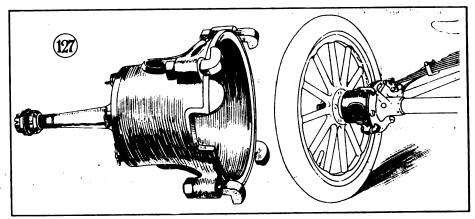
A device for towing a Ford with a broken axle. A front wheel is mounted on the spindle and the clamps tightened over the axle
